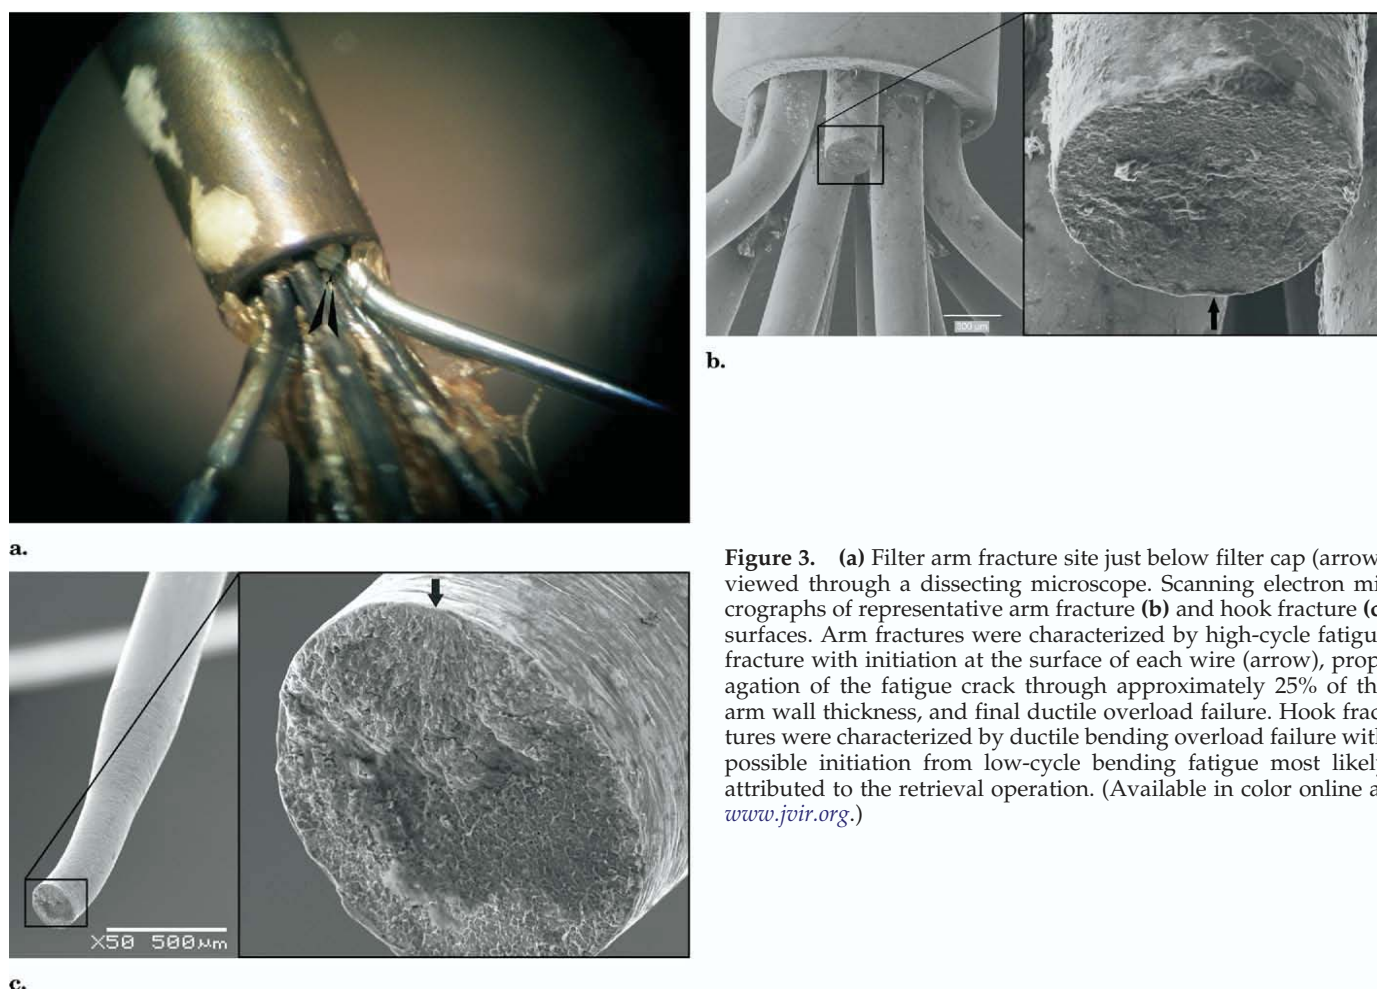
(a) Filter arm fracture site just below filter cap (arrow) viewed through a dissecting microscope. Scanning electron micrographs of representative arm fracture (b) and hook fracture (c) surfaces. Arm fractures were characterized by high-cycle fatigue fracture with initiation at the surface of each wire (arrow), propagation of the fatigue crack through approximately 25% of the arm wall thickness, and final ductile overload failure. Hook fractures were characterized by ductile bending overload failure with possible initiation from low-cycle bending fatigue most likely attributed to the retrieval operation. (Available in color online at www.jvir.org.)
